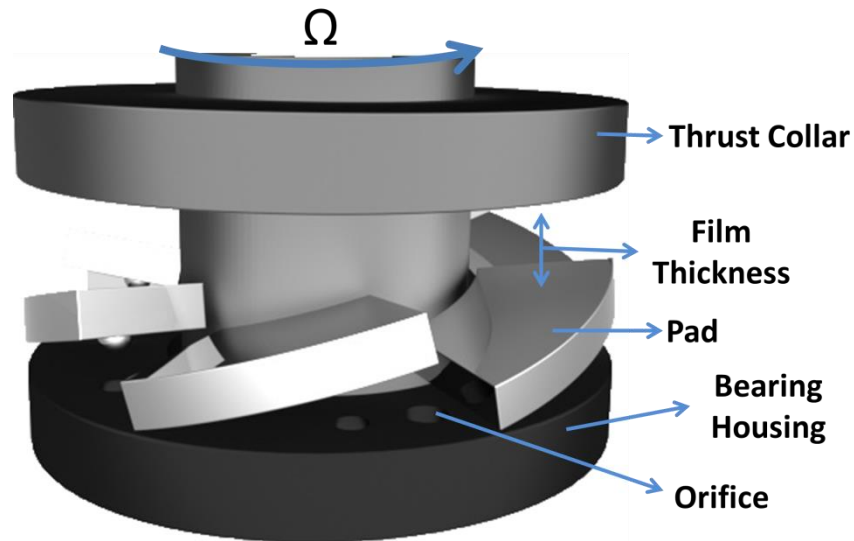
Schematic view of a tilting pad thrust bearing (Film thickness and pad tilts exaggerated).
